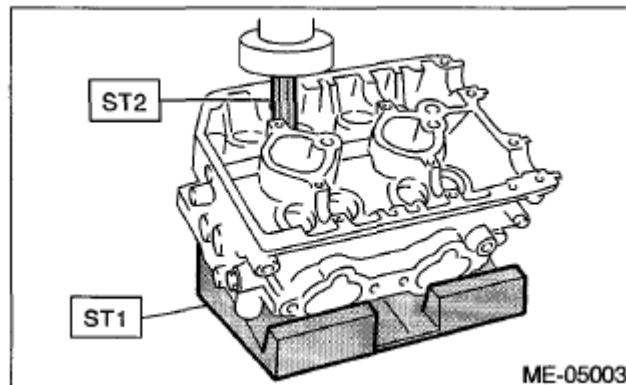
Removing Valve Spring Using Valve Spring Remover
